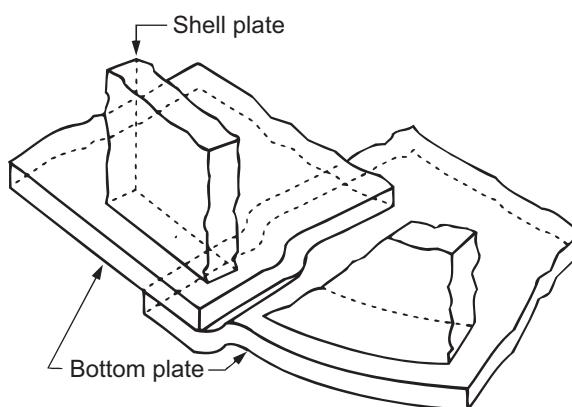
Method for Preparing Lap-welded Bottom Plates under the Tank Sidewall
